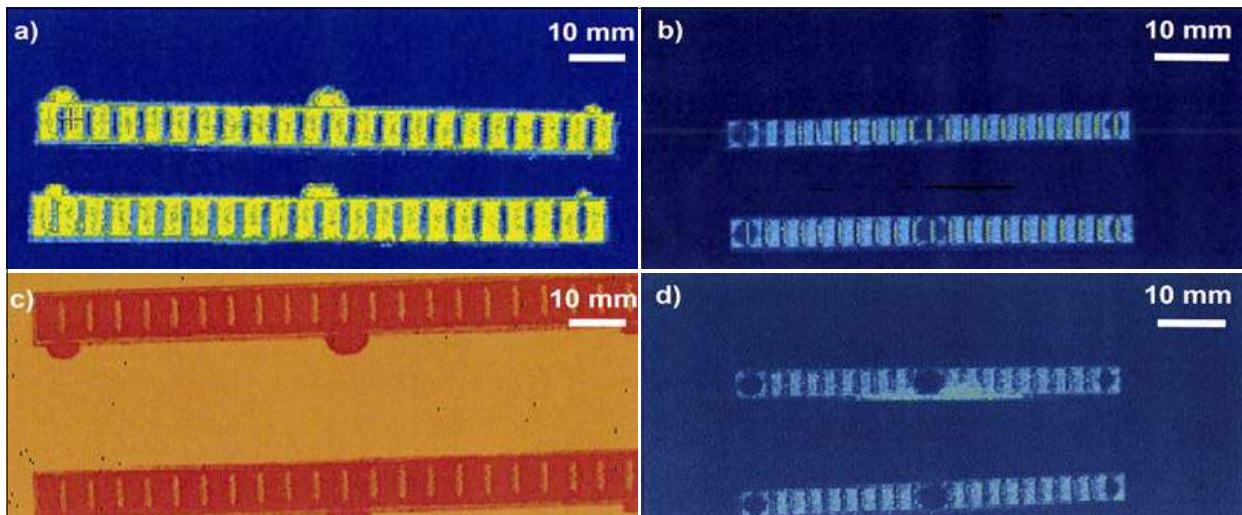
Ultrasonic inspection of the machined surfaces (a,b) and rough surfaces (c,d) of the test pieces where (a,c), (b) and (d) are the side, bottom and top surfaces respectively. The upper test pieces shown in the images (a-d) were heat treated prior to the ultrasonic inspection [1]
